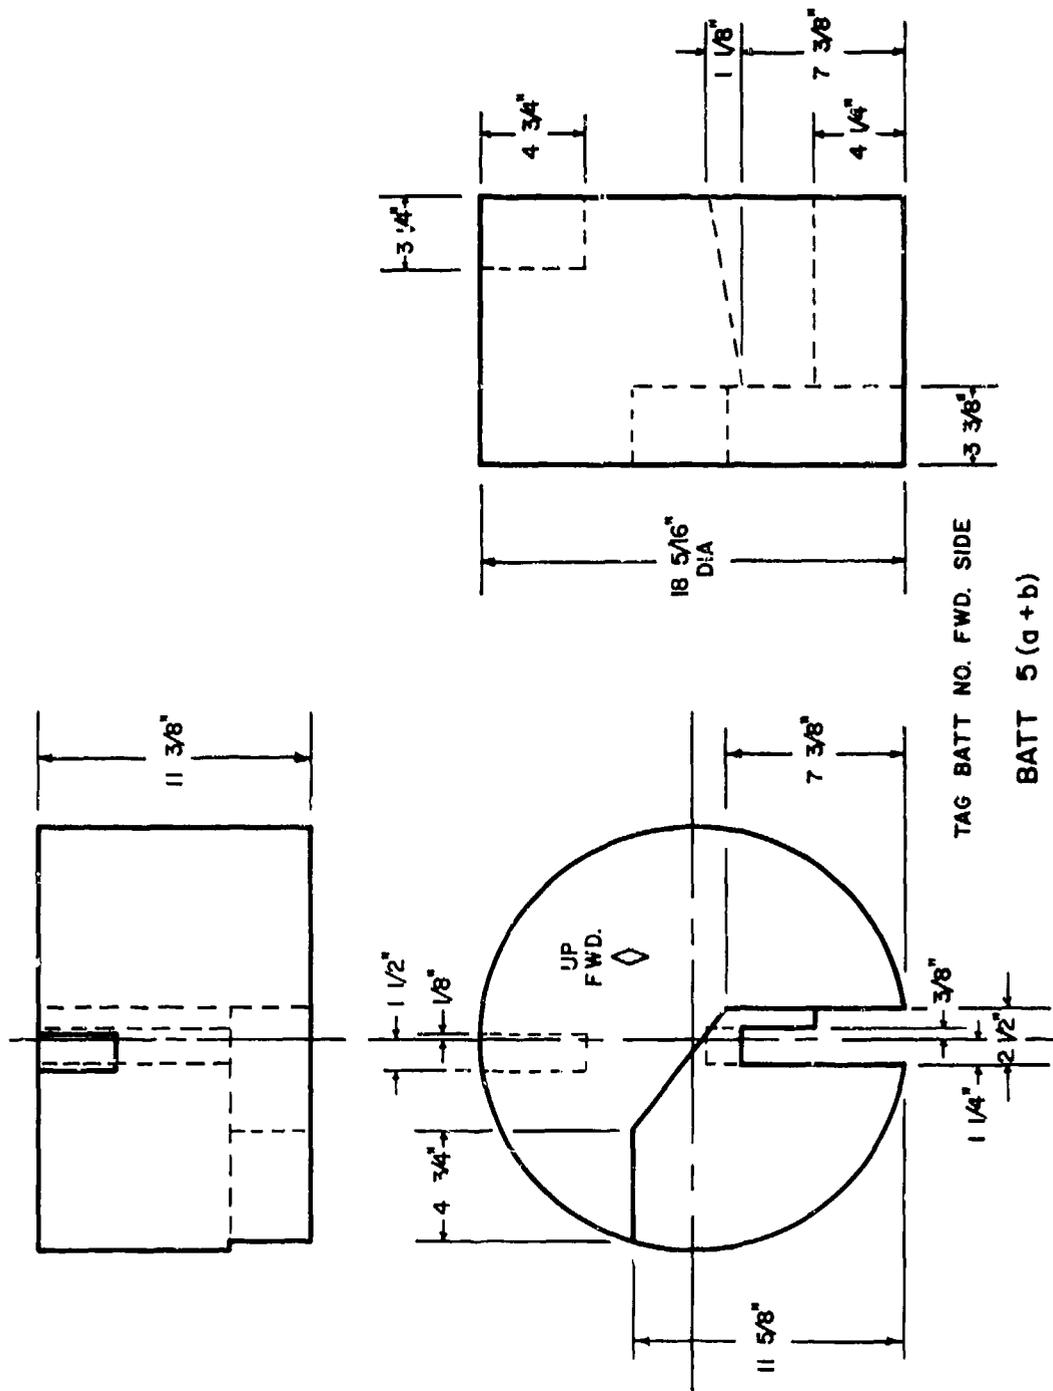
Batt Detail, Kellett 100 Gallon Tank
